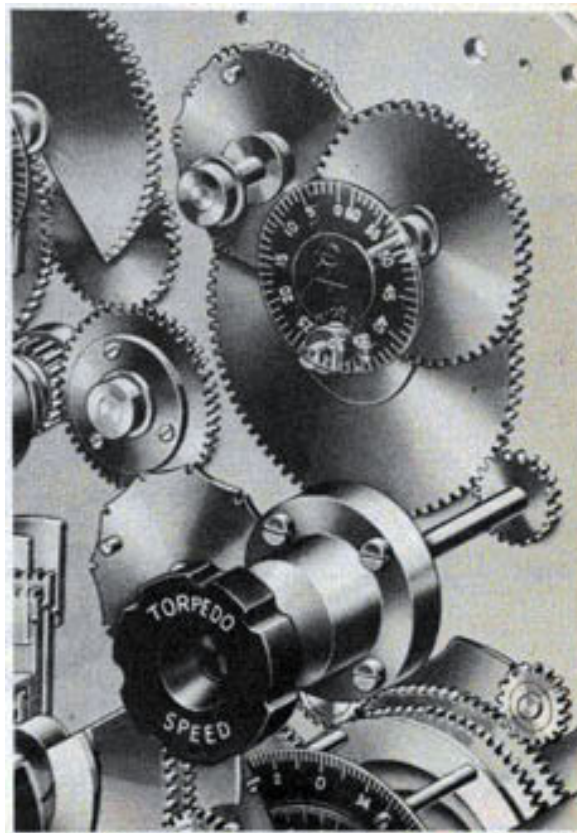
View of shaft driven single dial assembly showing details of intermittent type limit stop.
